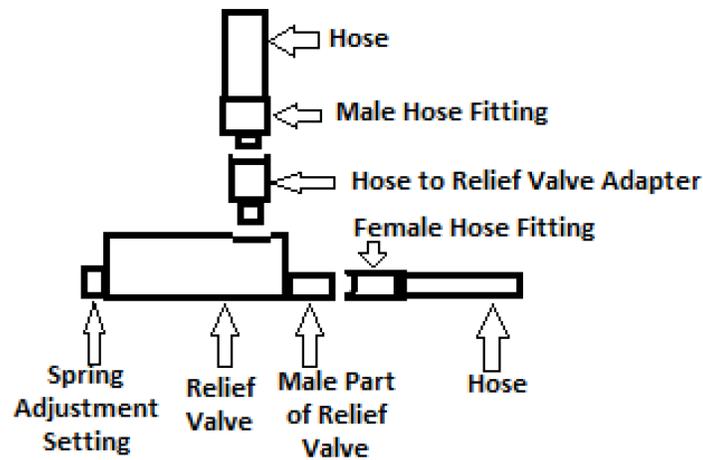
Drawing shows How the Relief Valve is Connected to the Hose
